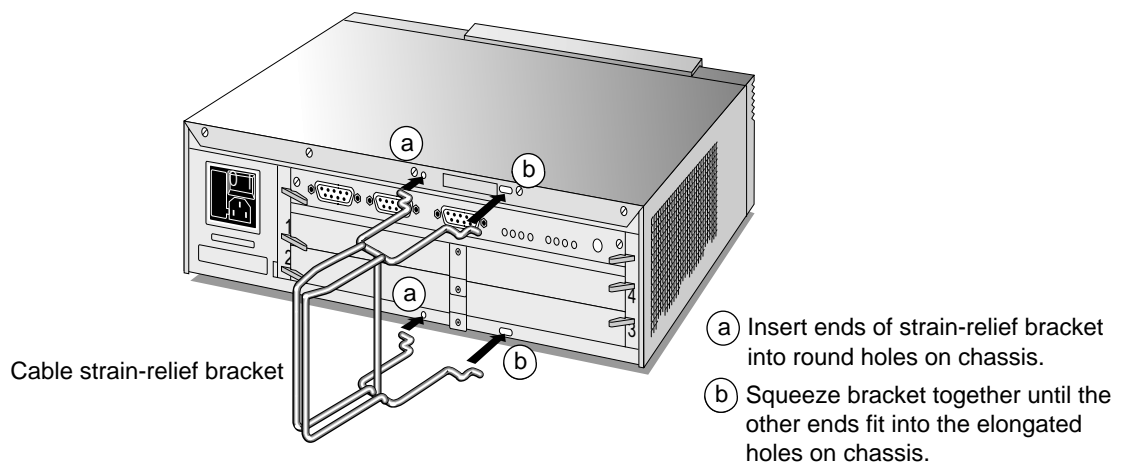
Installing the Cable Strain-Relief Bracket on the 4-Slot Chassis
